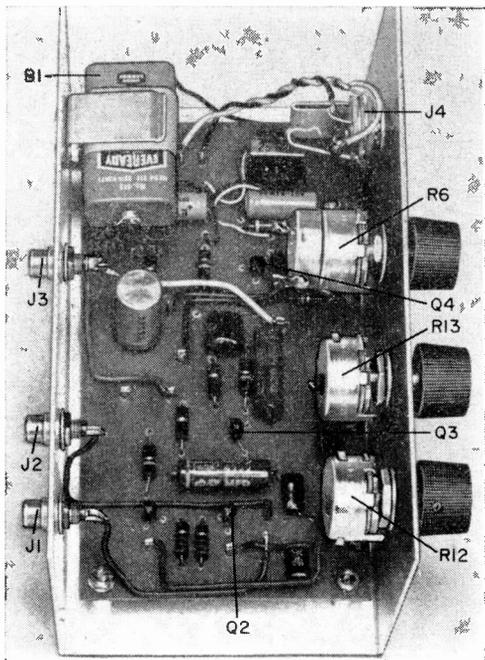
Metal spacers should be used to support the circuit board away from the chassis. Mount the board as shown; then wire the controls, battery, and jacks into the circuit.
